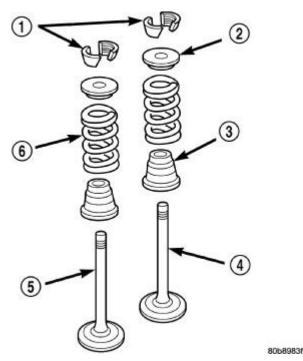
Valve Assembly Configuration Courtesy of CHRYSLER LLC
